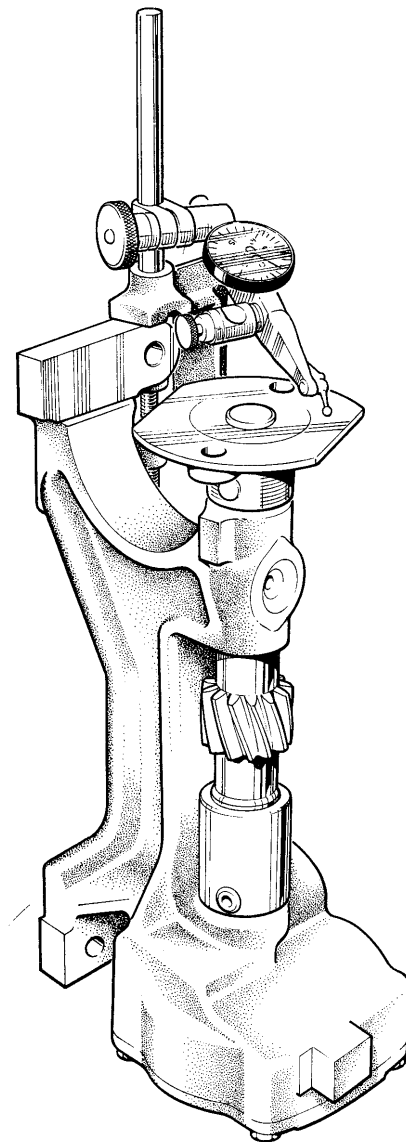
CHECKING GOVERNOR TOWER RUN-OUT
